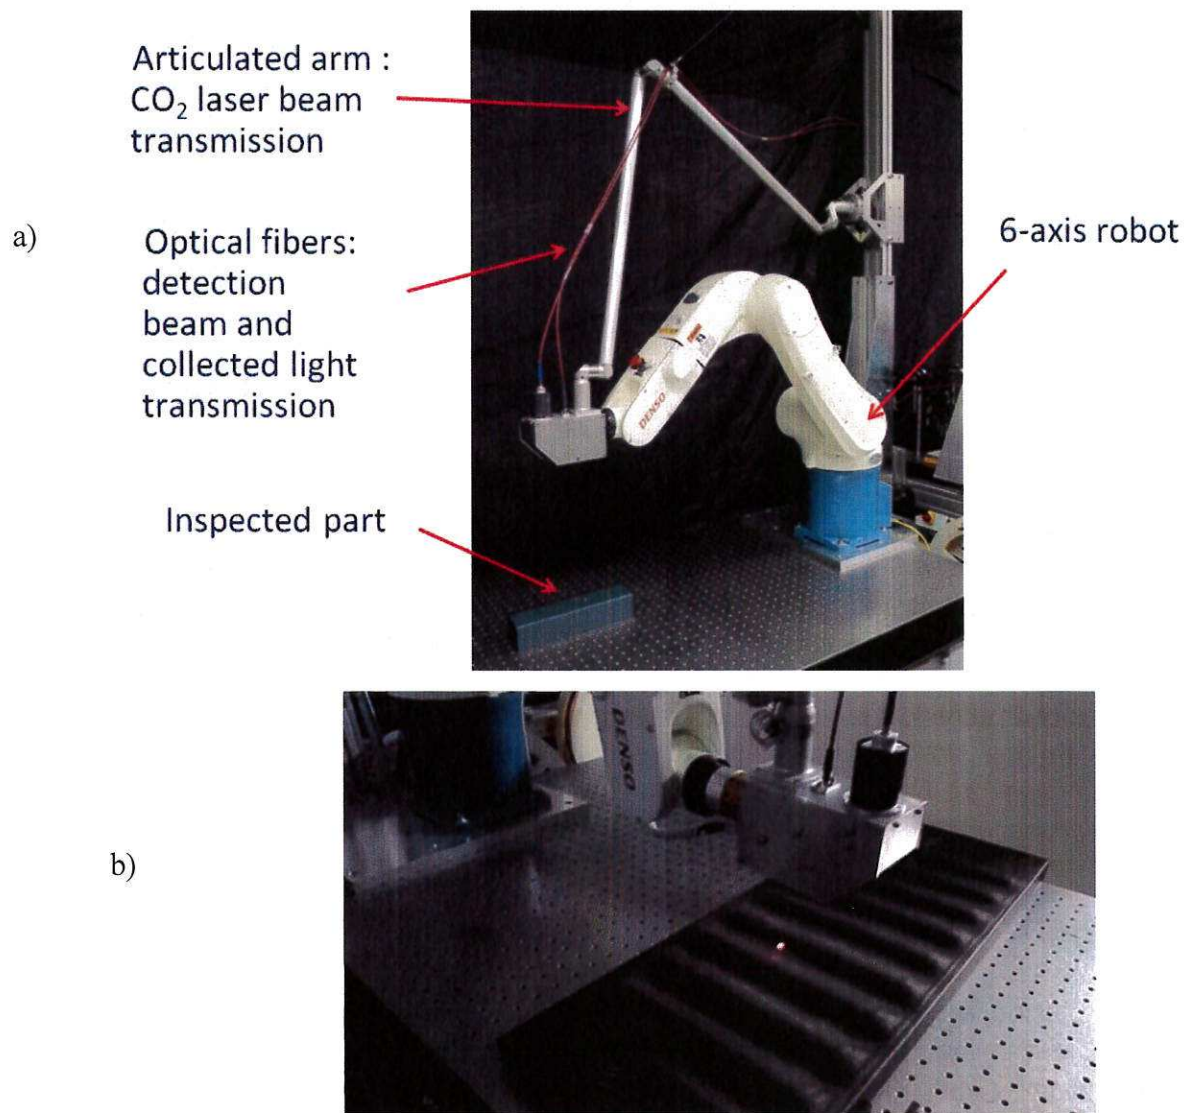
b. View of the reported robotic implementation, a: view of the robot with inspection head and coupling means for generation and detection, b: closer view of the inspection head above a sinusoidal part being scanned (the large size CO₂ laser which is like the one shown in Figure 3b is not shown).
